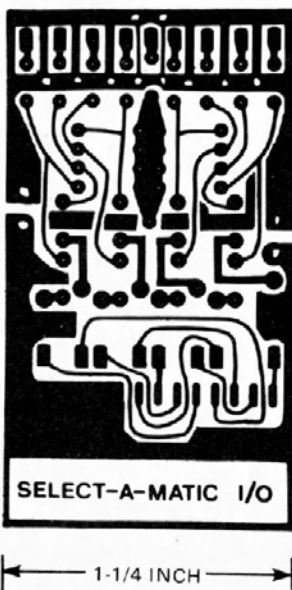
FOIL SIDE of the I/O board. Four of these single-sided boards are required.
